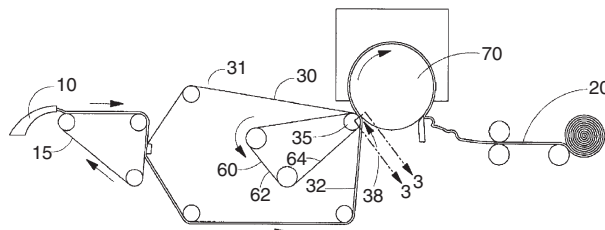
Patent drawing of modern tissue machine (US patent 6,447,642). Tissue machines, because of the light-weight sheet that they produce, tend to be smaller with a single, oversized dryer can (70).
